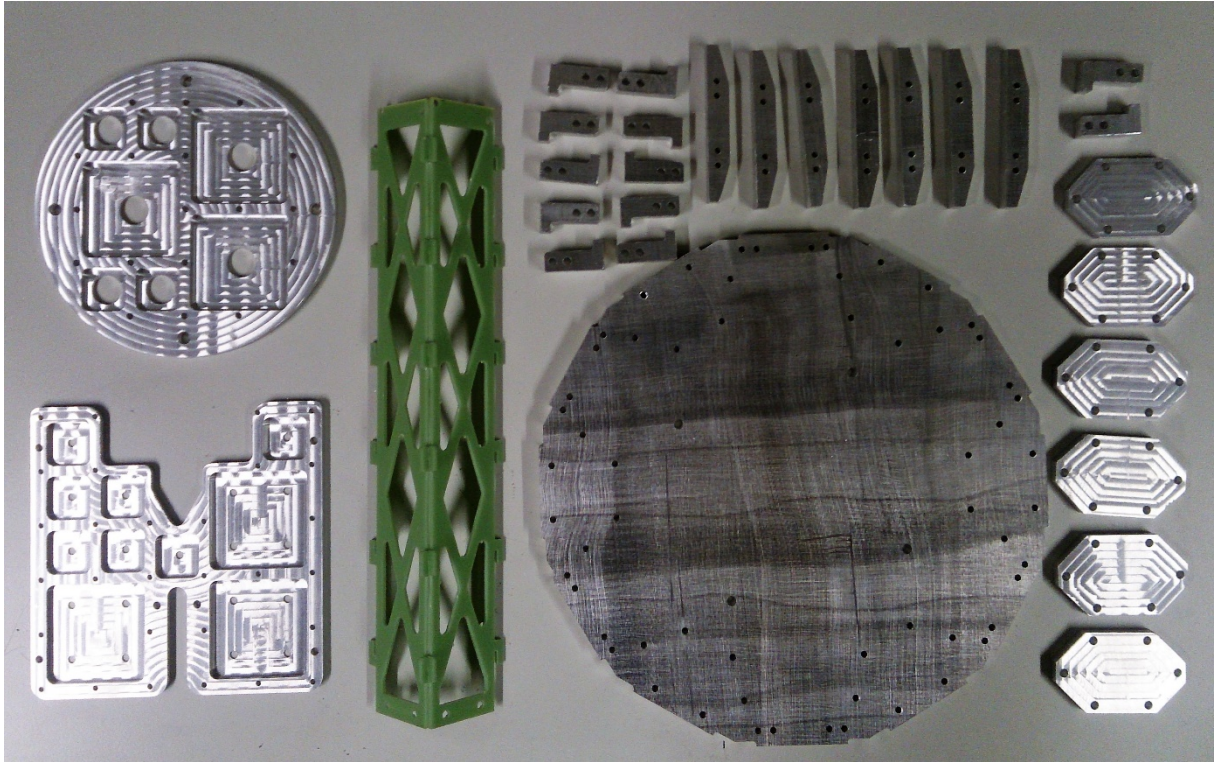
Display of most parts produced using the CNC machine at the workshop.
